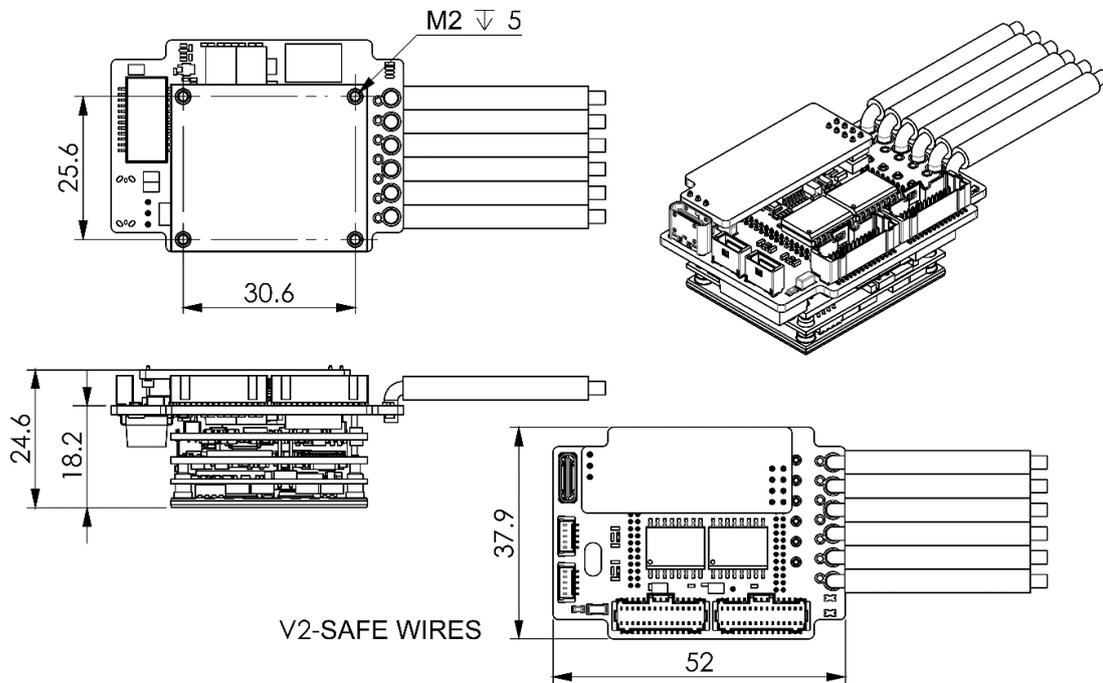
Platinum Solo Twitter – Wired version without Heat Sink Dimensions
